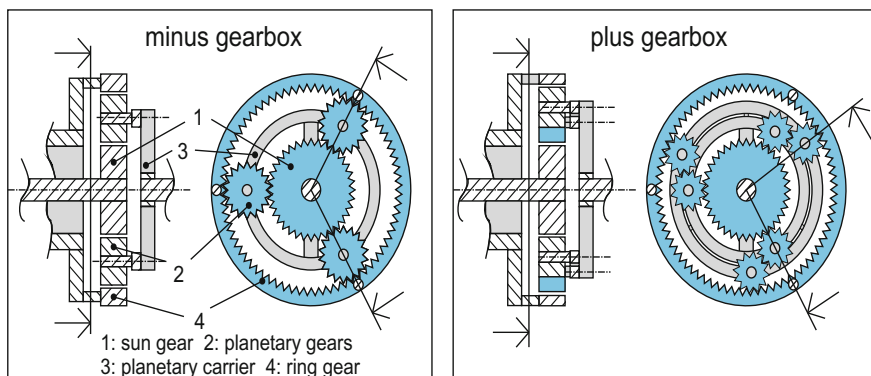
Mechanical design of minus and plus planetary gearboxes
